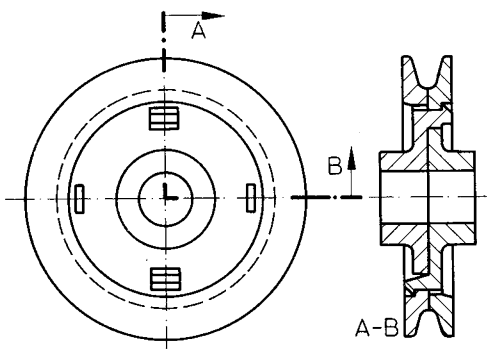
Polyamide V-belt pulley, assembled from two identical parts by means of a snap connection
